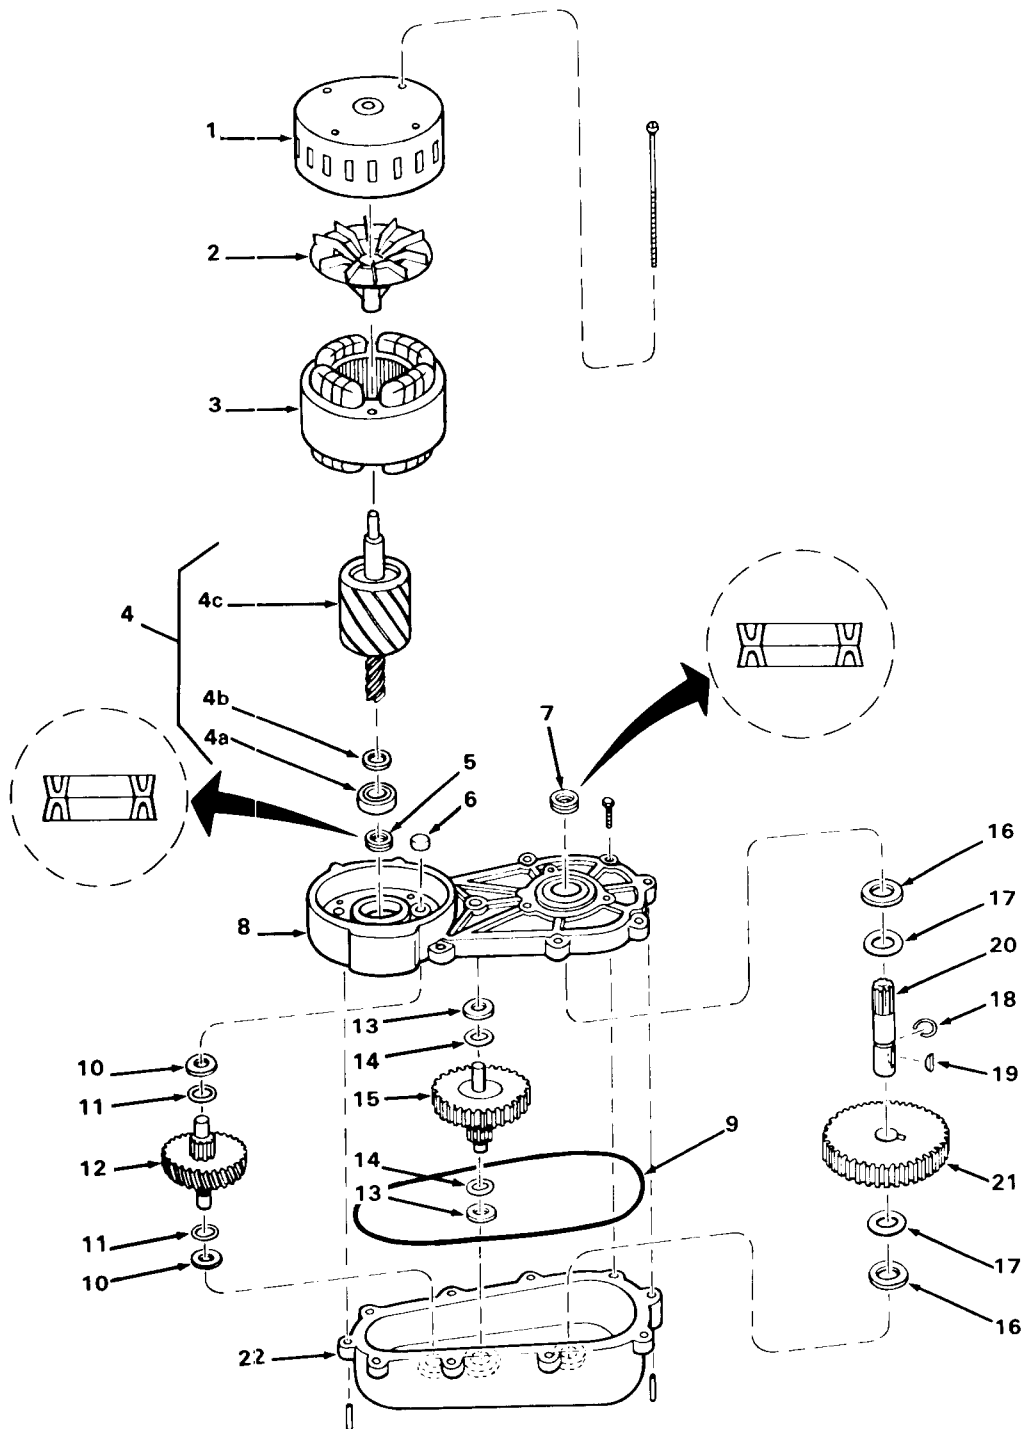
Drivemotor Assembly — 1/10 H.P.
